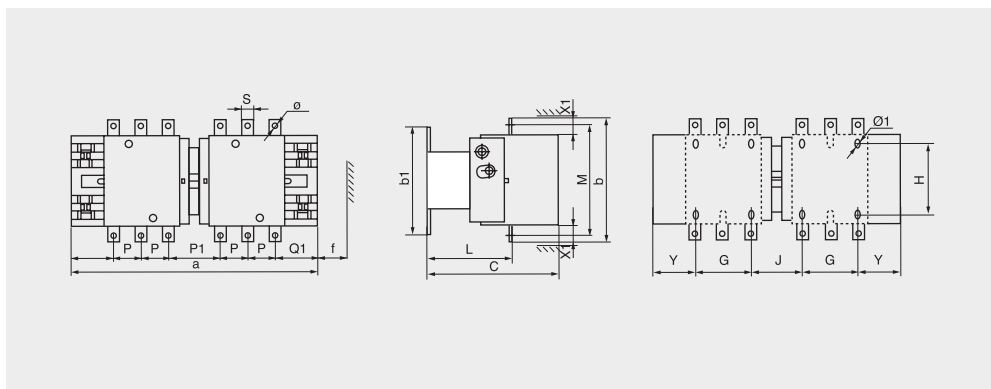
CJX2-F400N~F500N, CJX2-410N~475N(Horizontal installation)
